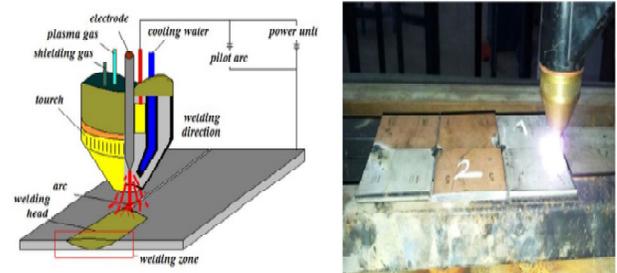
Schematic view of PTA welding and Image of PTA welding process [15].
